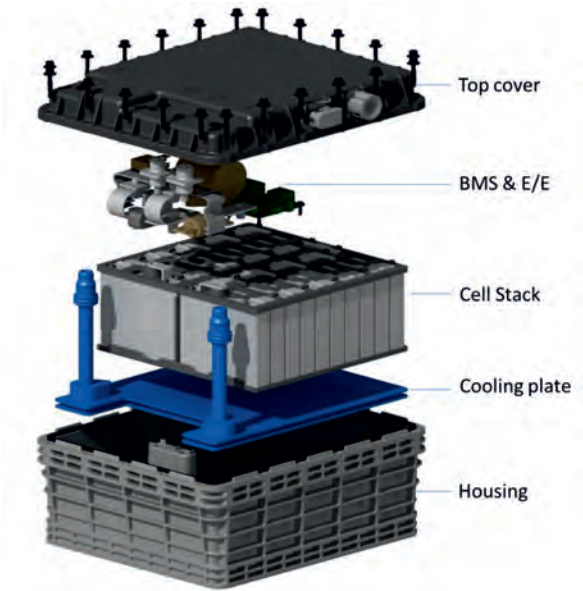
MAHLE 48-volt MHEV Battery 1 kWh – exploded view
